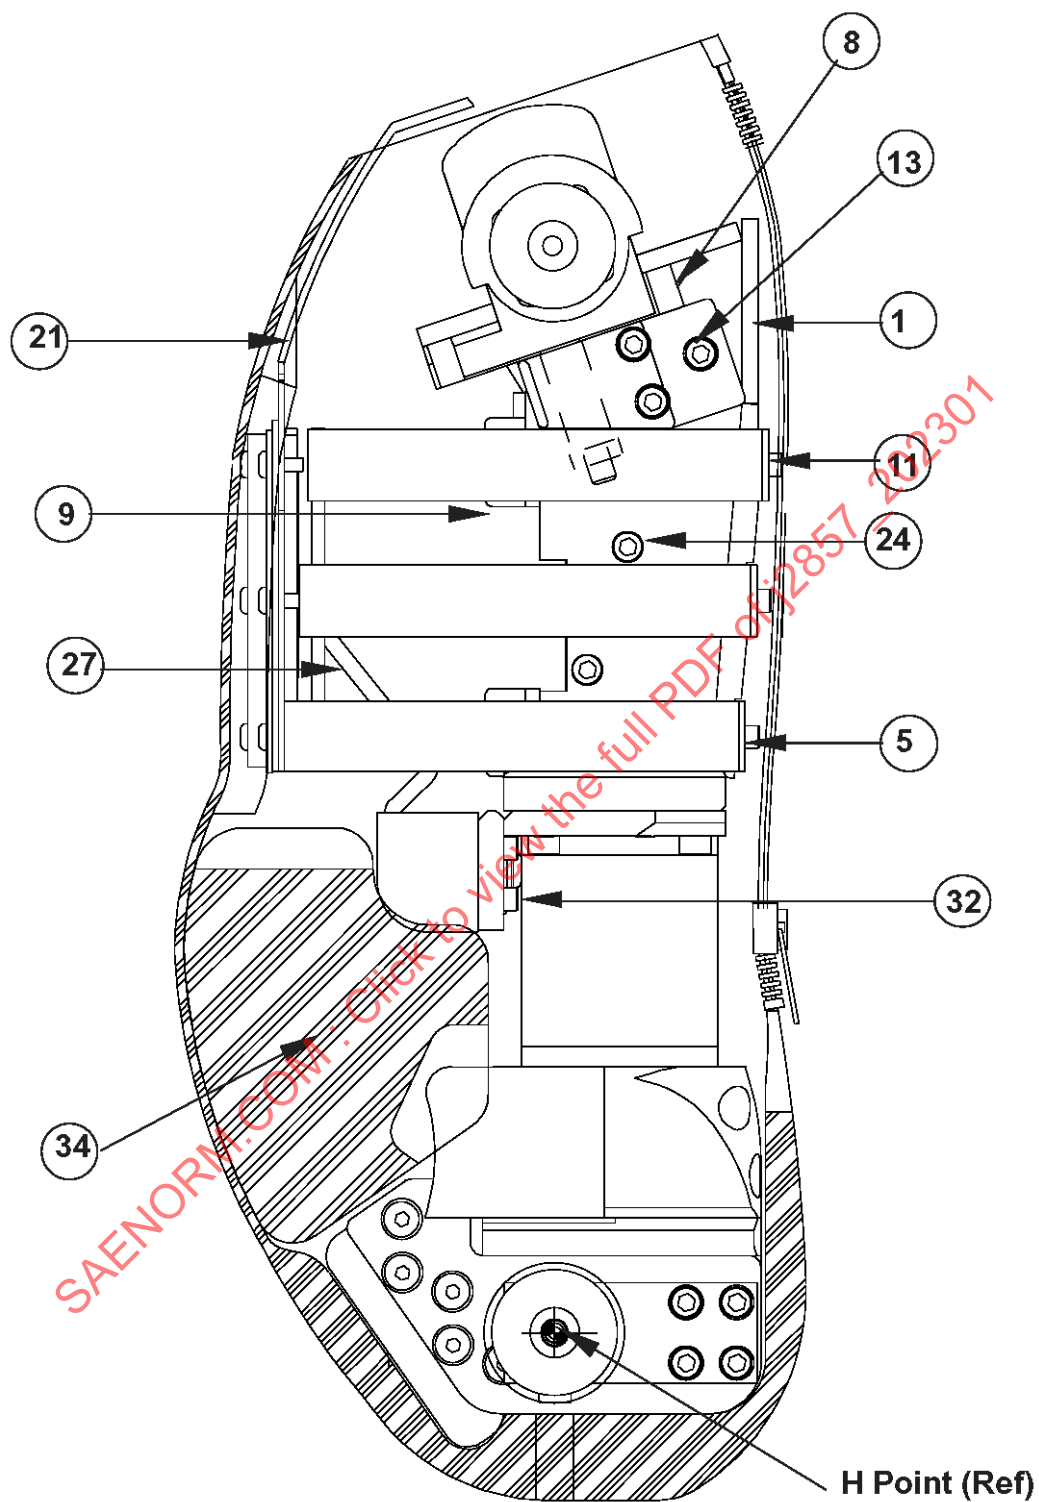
SIDE VIEW OF TORSO ASSEMBLY
